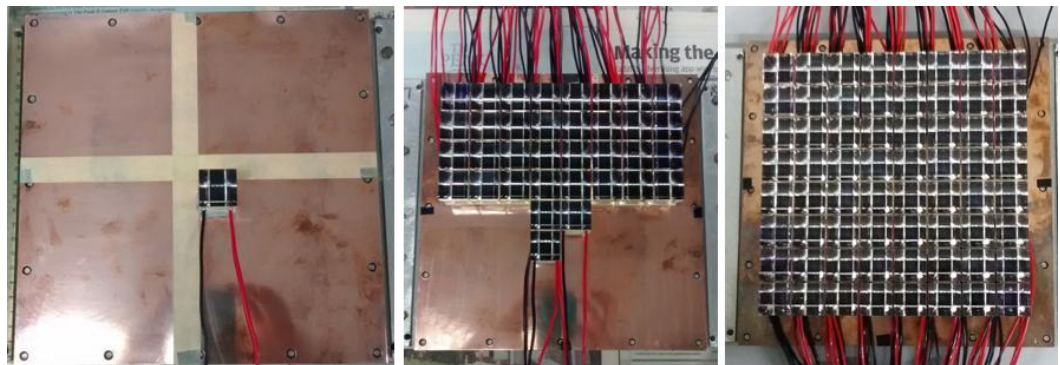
The process of attaching the CCPC + CPV assembly set to a copper block heat sink starting with a single assembly set until completing the  $8 \times 8$  array.
